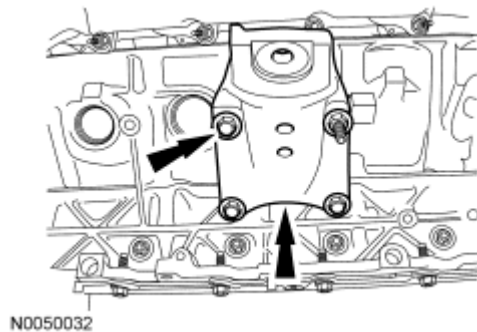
Locating RH Engine Support Insulator Bracket Bolts & Stud Bolt
